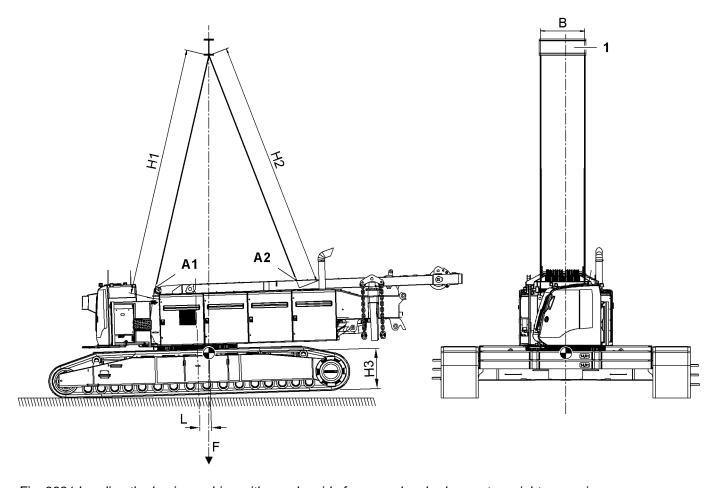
Loading the basic machine with crawler side frame and carbody counterweight - overview
